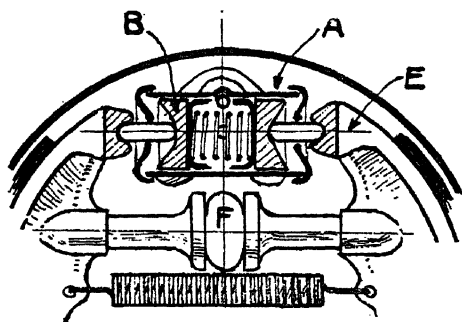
Lockheed Wheel Cylinder Arrangement.
